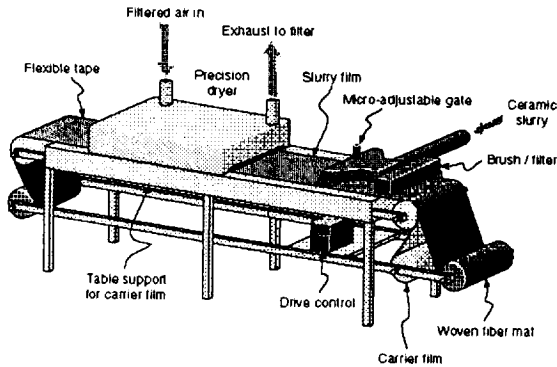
Overview of a typical (small-scale) tape casting facility. The principal components are the casting bed, tape drive system, caster, drying furnace and outgassing furnace.
